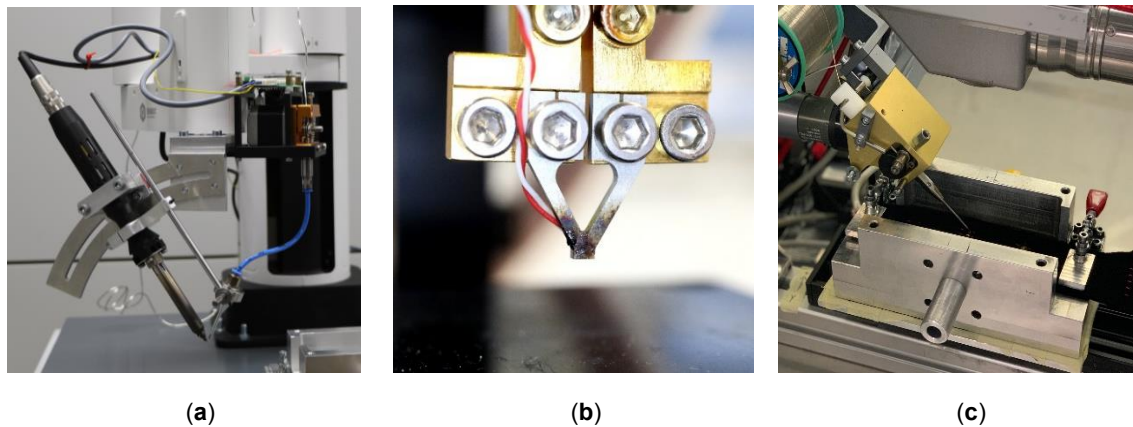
Substance-to-substance connection methods for smart textiles: (a) Ultrasonic soldering, (b) Hot bar soldering, (c) laser soldering.
